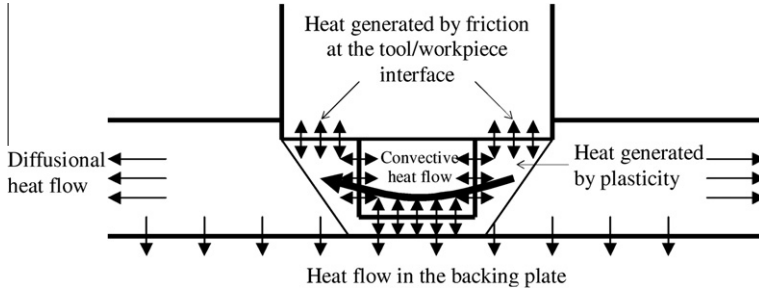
Schematic of the heat generation and transfer in the friction stir welding process.
